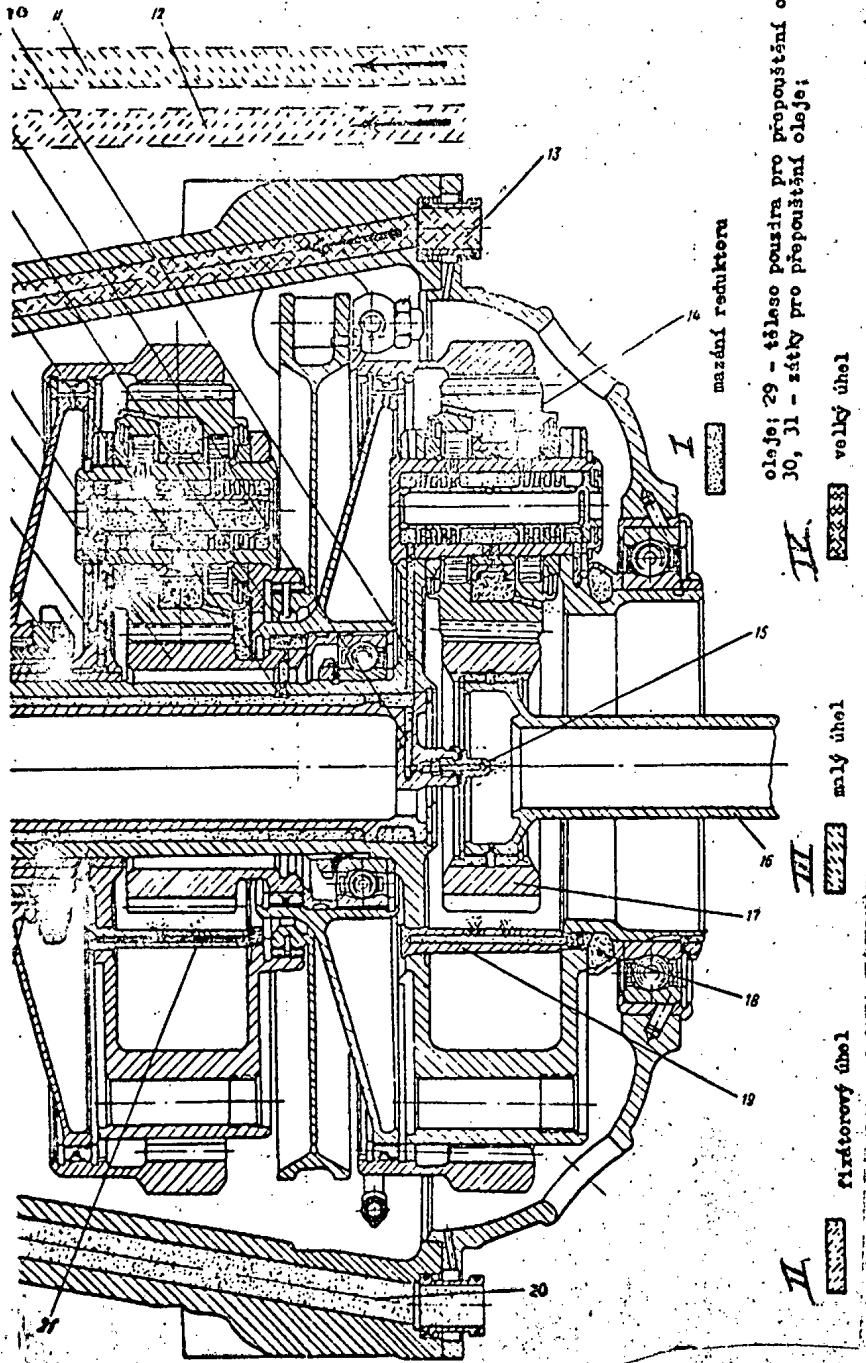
Reduction gear lubrication system - I. Reduction gear lubrication system; II. Feathered [pitch]; III. Low pitch; IV. High pitch; 1. Ball bearing; 2. Annular groove; 3. Recess; 4. Hole; 5. Countershaft sun gear; 6. Planet gear; 7. Nozzle; 8. Ring gear hub; 9. Oil supply channel; 10. Bore; 11, 12, 13. Channel system; 14. Planet gear; 15. Nozzle; 16. Drive shaft; 17. Sun gear; 18. Cavity; 19. Nozzle; 20. Oil supply channel for lubrication of reduction gear; 21. Nozzle; 22. Hole; 23. Planet gear carrier; 24. Oil passage sleeve; 25. Annular cavity; 26. Propeller shaft; 27. Oil distribution liner; 28. Oil passage sleeve; 29. Oil passage inserts housing; 30, 31. Oil passage inserts
